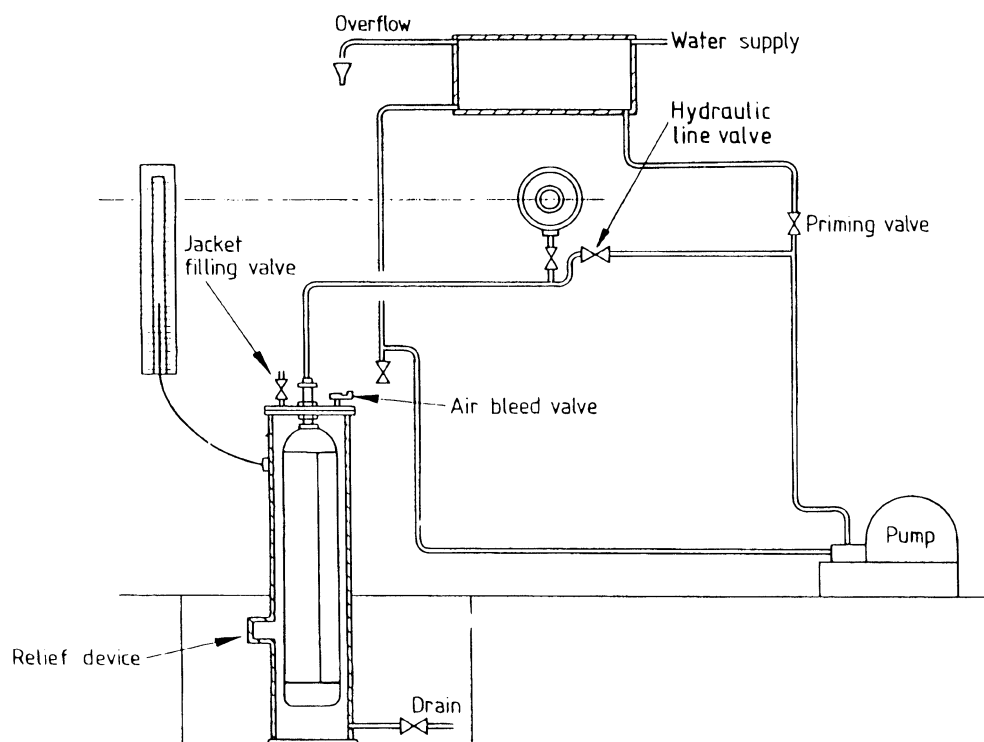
Water jacket volumetric expansion test (fixed burette)
